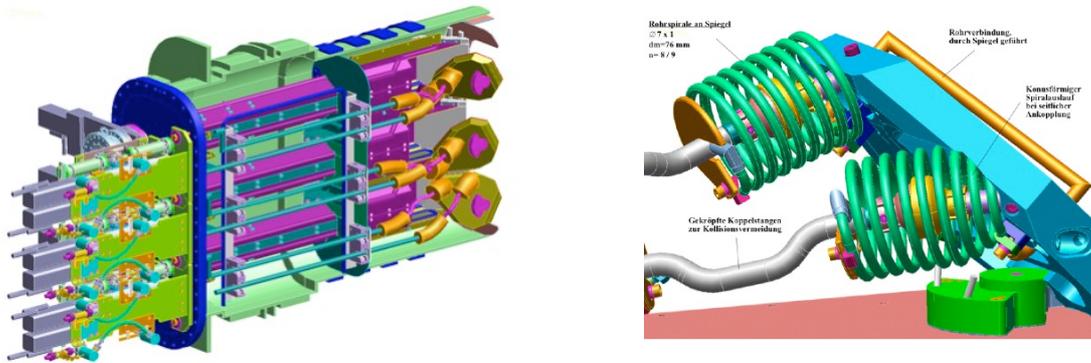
Left: Front steering plug-in launcher. Right: Detail of the movable front mirror with driving rods and cooling spirals.
